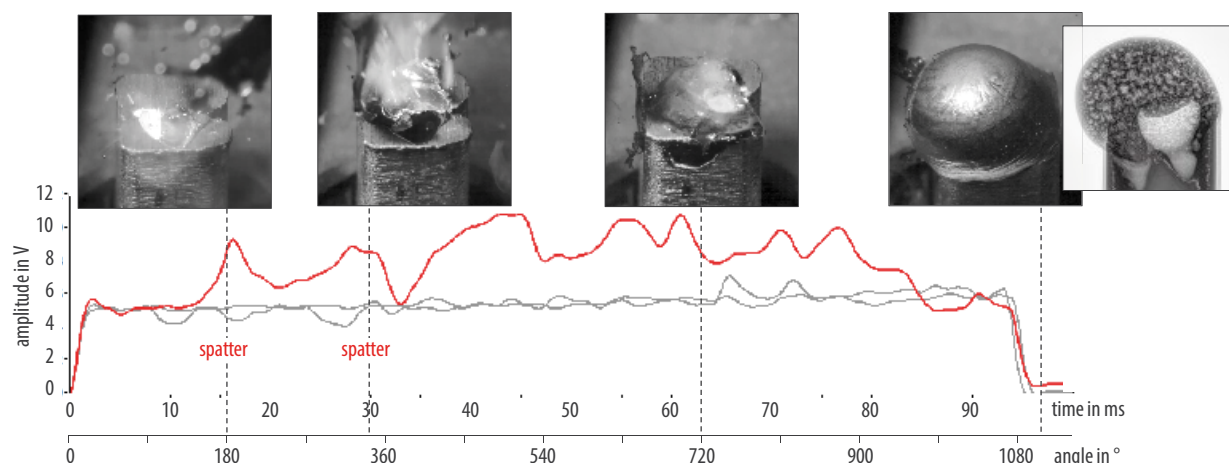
Hairpin welding – remaining traces of isolation between the hairpins cause massive melt pool ejections
